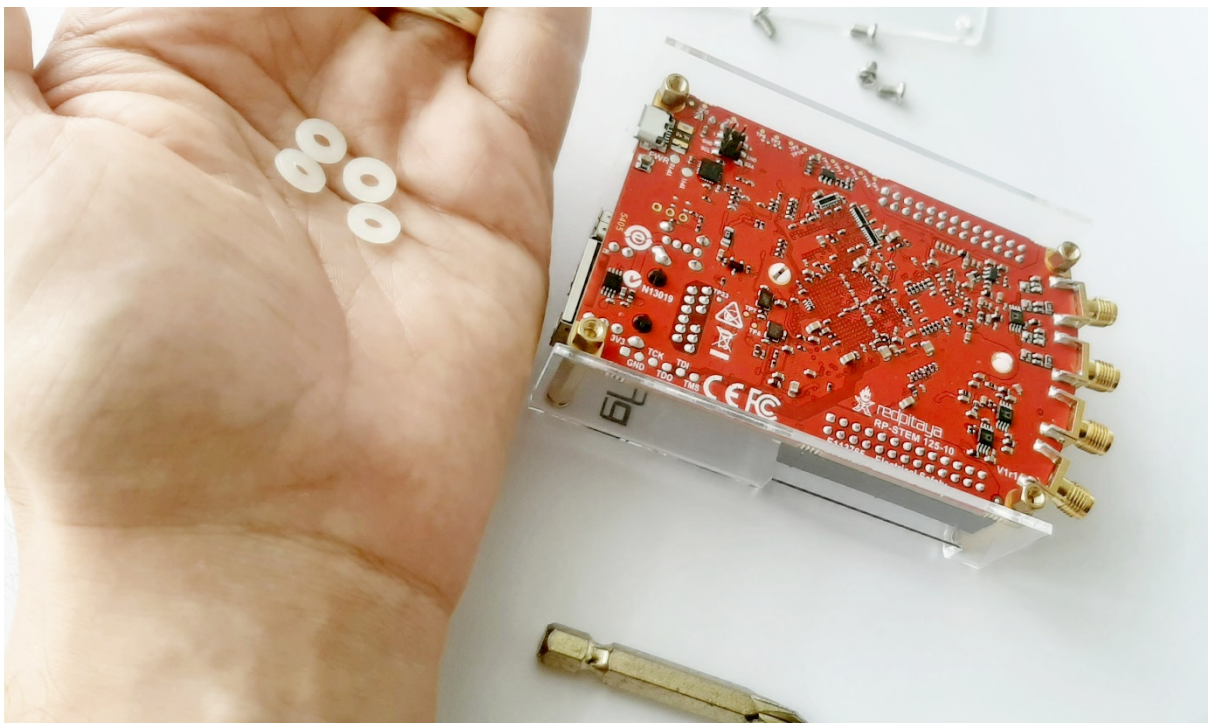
If CN11 connector is present use included plastic washers when mounting bottom part.
